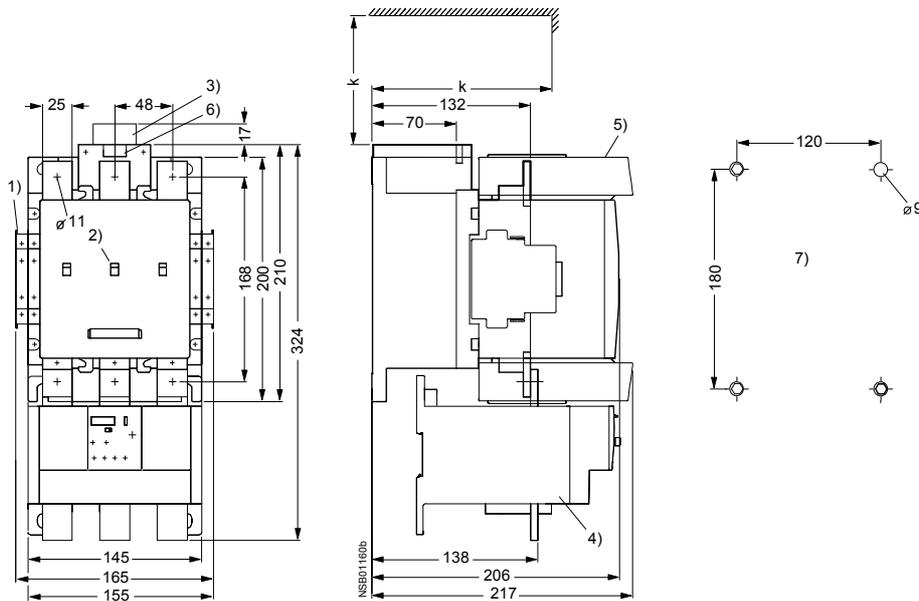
3RT12 6 Vacuum contactors with side-mount auxiliary contact, installed overload relay and box terminals, side-mounted electronic module with remaining lifetime indication
